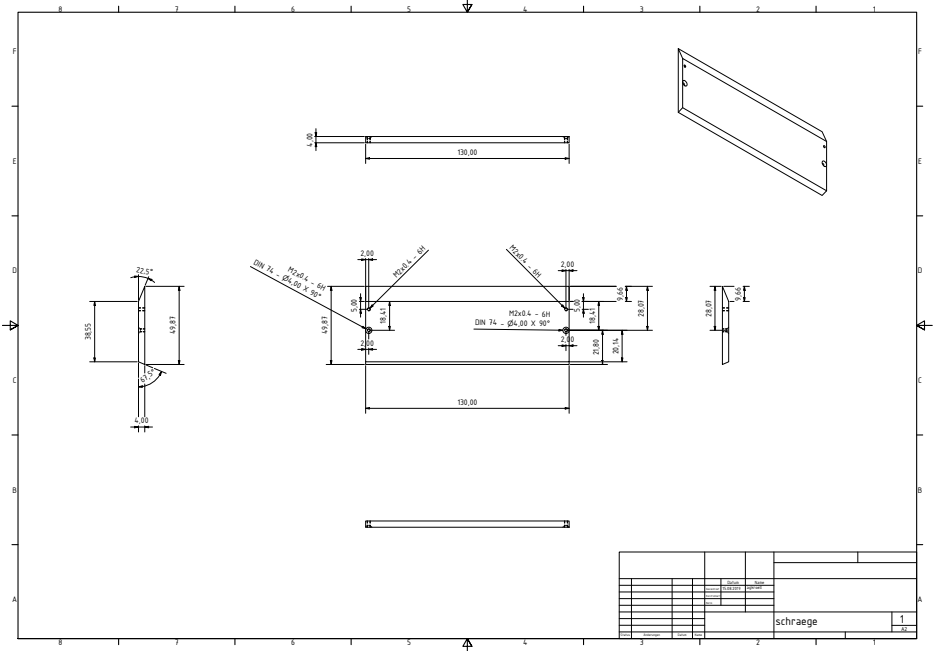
Technical drawing of the sloping plate of a box from the back part of the pair spectrometer.
